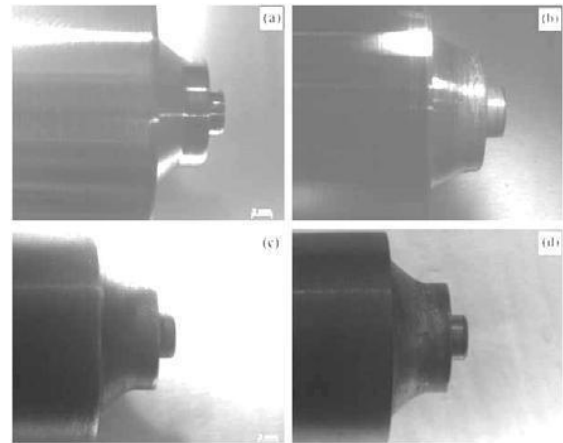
Optical images of (a) AISI H13 before welding (b) AISI H13 after welding (c) Bohler K390 before welding (d) Bohler K390 after welding
